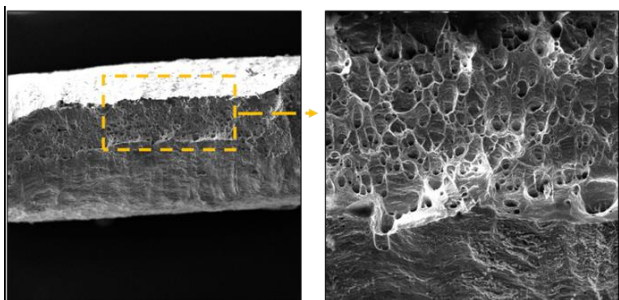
Tensile fracture surfaces of AA5052 Aluminum alloy
